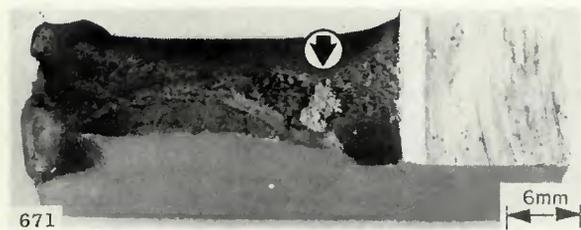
Hydrogen flake in fracture surface of LB weld in 12.7 mm thick HY-130 DT specimen
